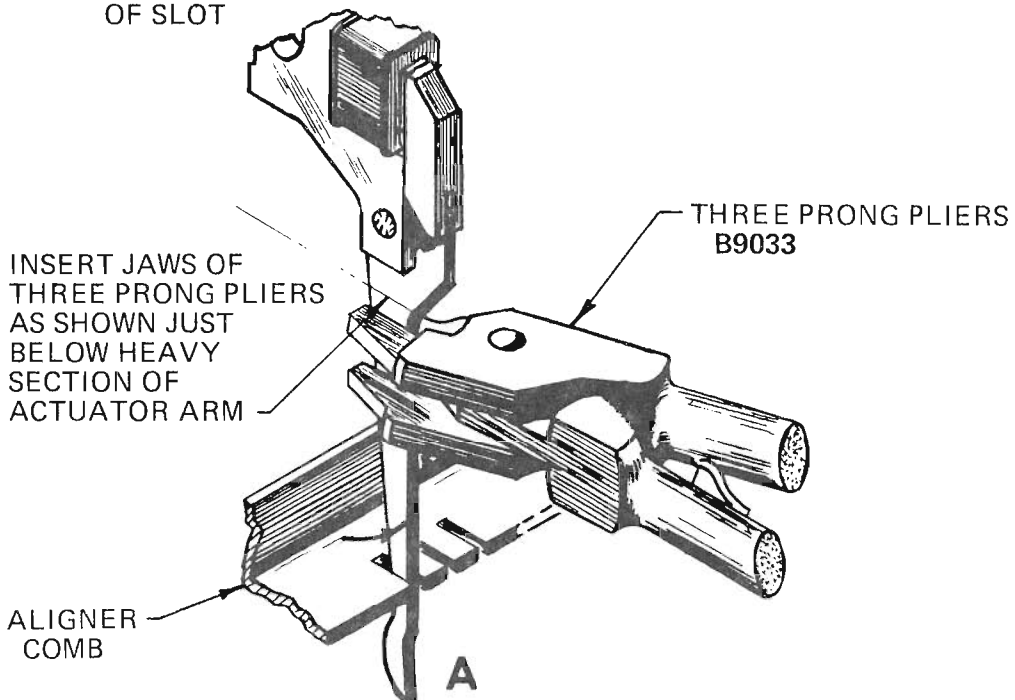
Removal Procedure, Hammer Bank Assembly
